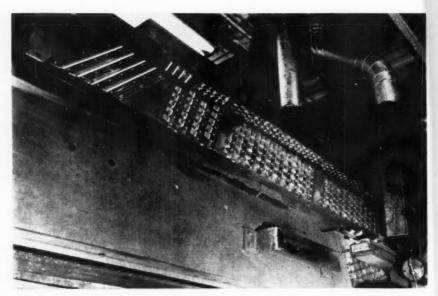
The larger broaches are used for machining the two faces of the cast iron cylinder heads. Rail broaches, of similar design to the main broaches, machine the two sides of the castings. Broaches are clamped onto the machine columns.
